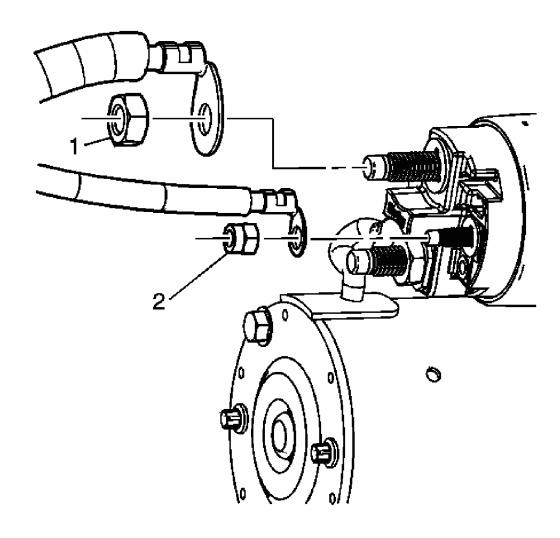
View Of Starter & Cables Courtesy of GENERAL MOTORS CORP.
